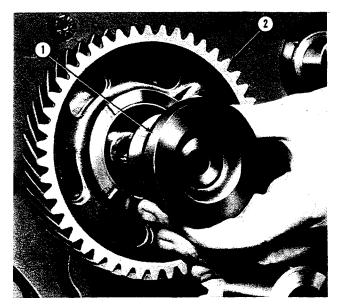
Removing Camshaft Drive Gear Adapter 1. Adapter
